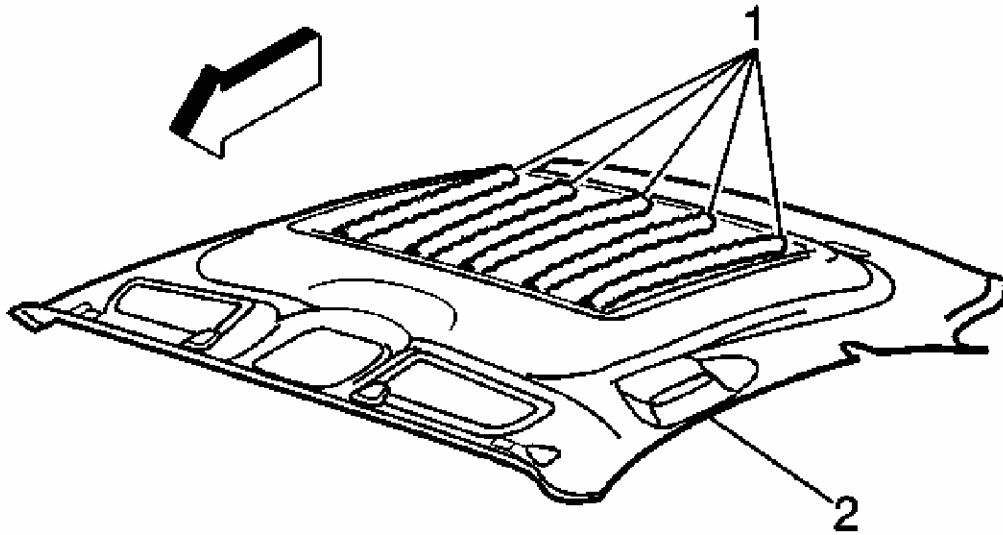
Removing/Installing Headliner Cardboard Insulator
